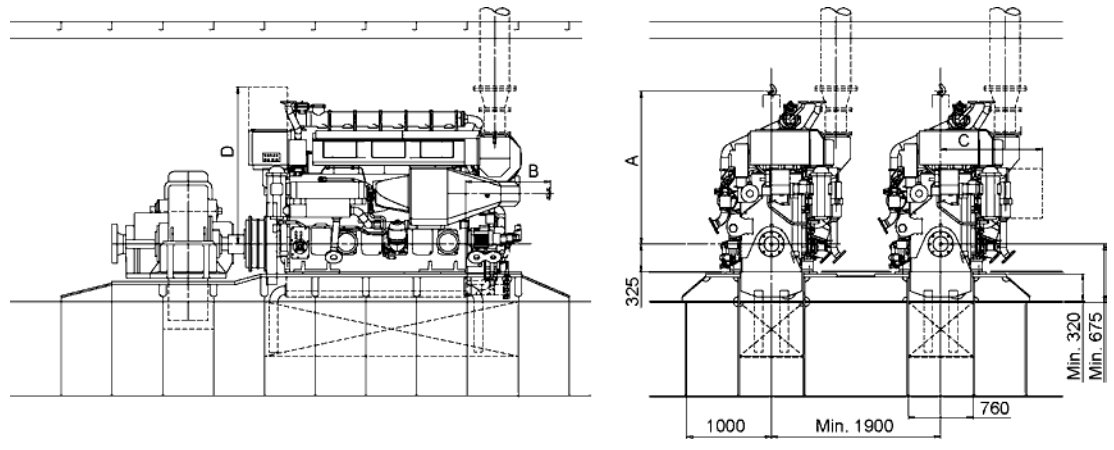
Crankshaft distances main engines (DAAF017589)
